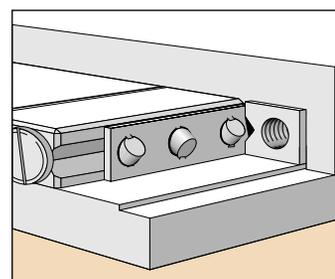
Crossed-roller bearings have all the advantages of ball bearings with greater stiffness and load capacity.
